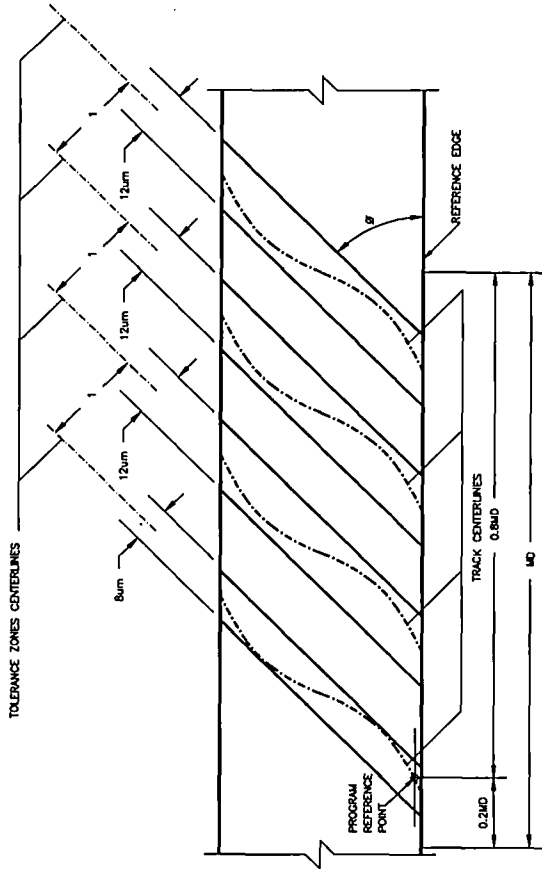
Location and dimensions of tolerance zones of helical track record
